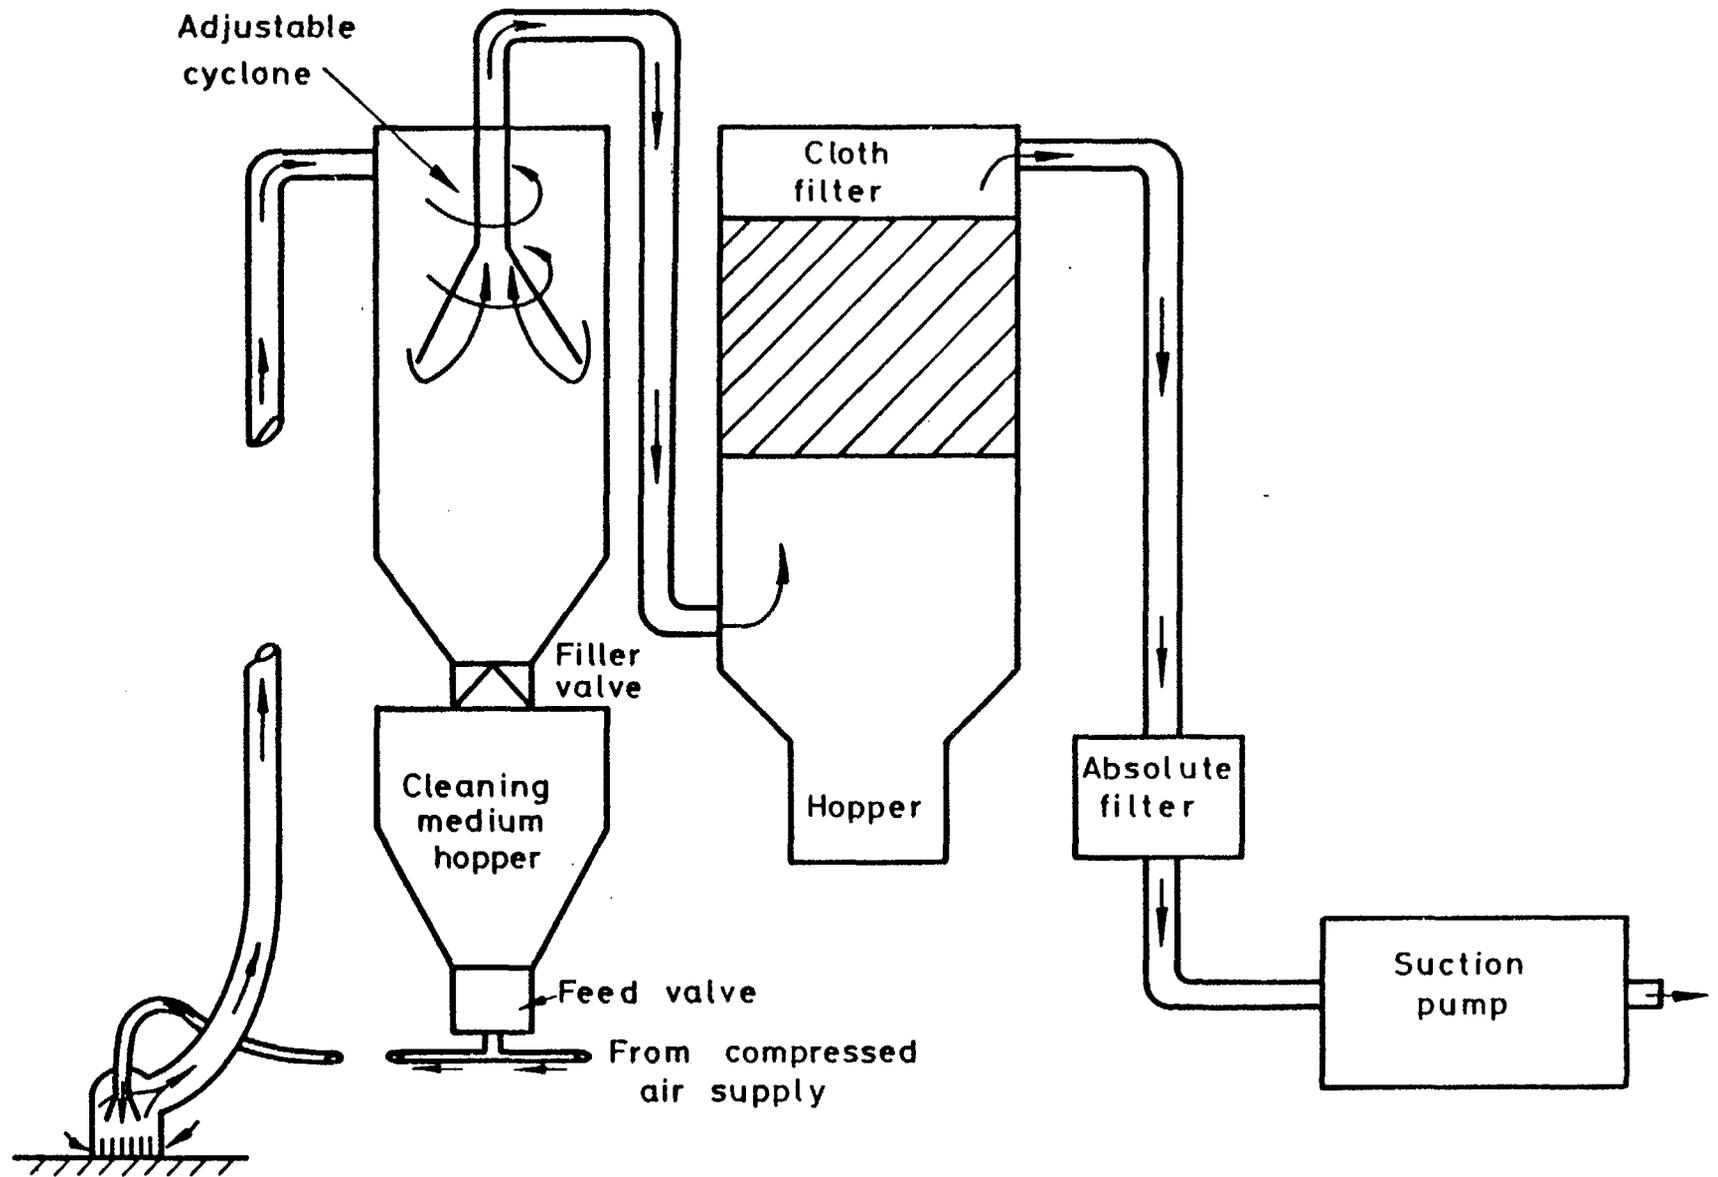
Schematic Illustration of the Layout of the Vacu-Honer Machine.
